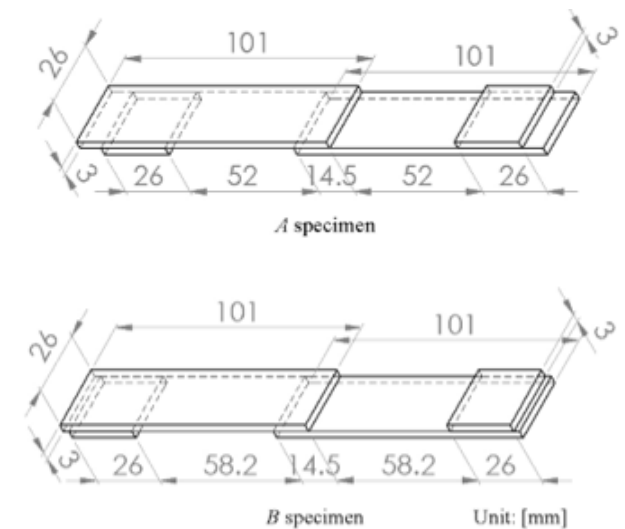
Shape and dimensions of the single lap-shear joint (SLJ) specimens for tensile tests.
